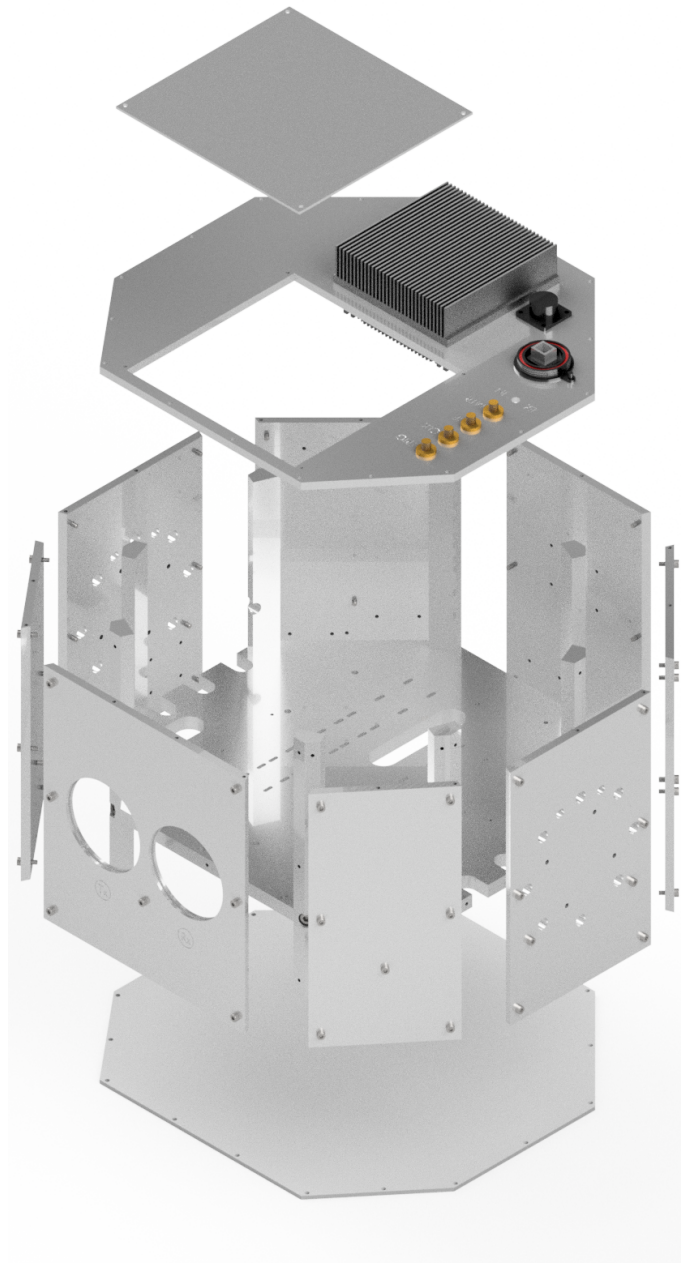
Exploded view of the radar enclosure showing construction from multiple aluminium plates.
